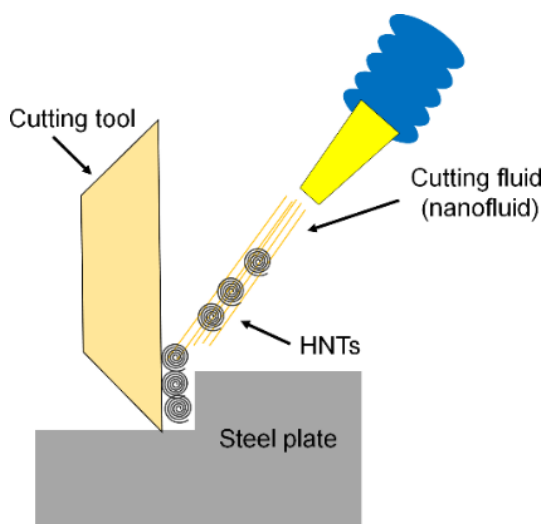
Load-bearing effect of the HNTs between the cutting tool and the work piece.
